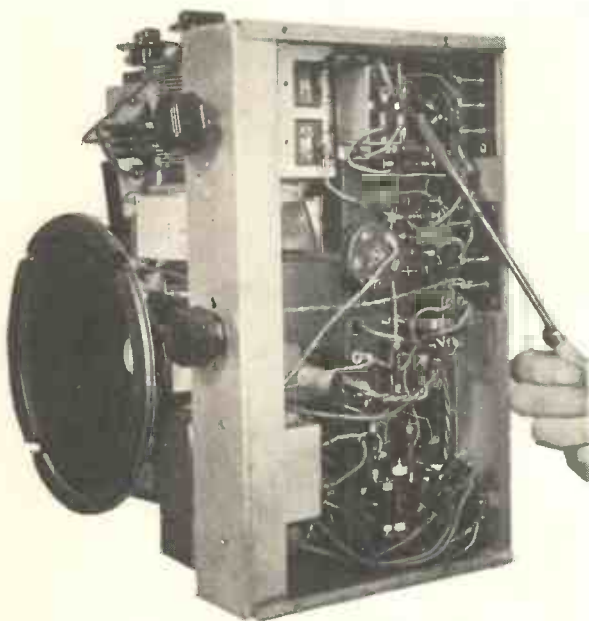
SHORTING A HEATER LEAD TO CHASSIS TO CHECK THE INSULATION OF THIS CIRCUIT.
